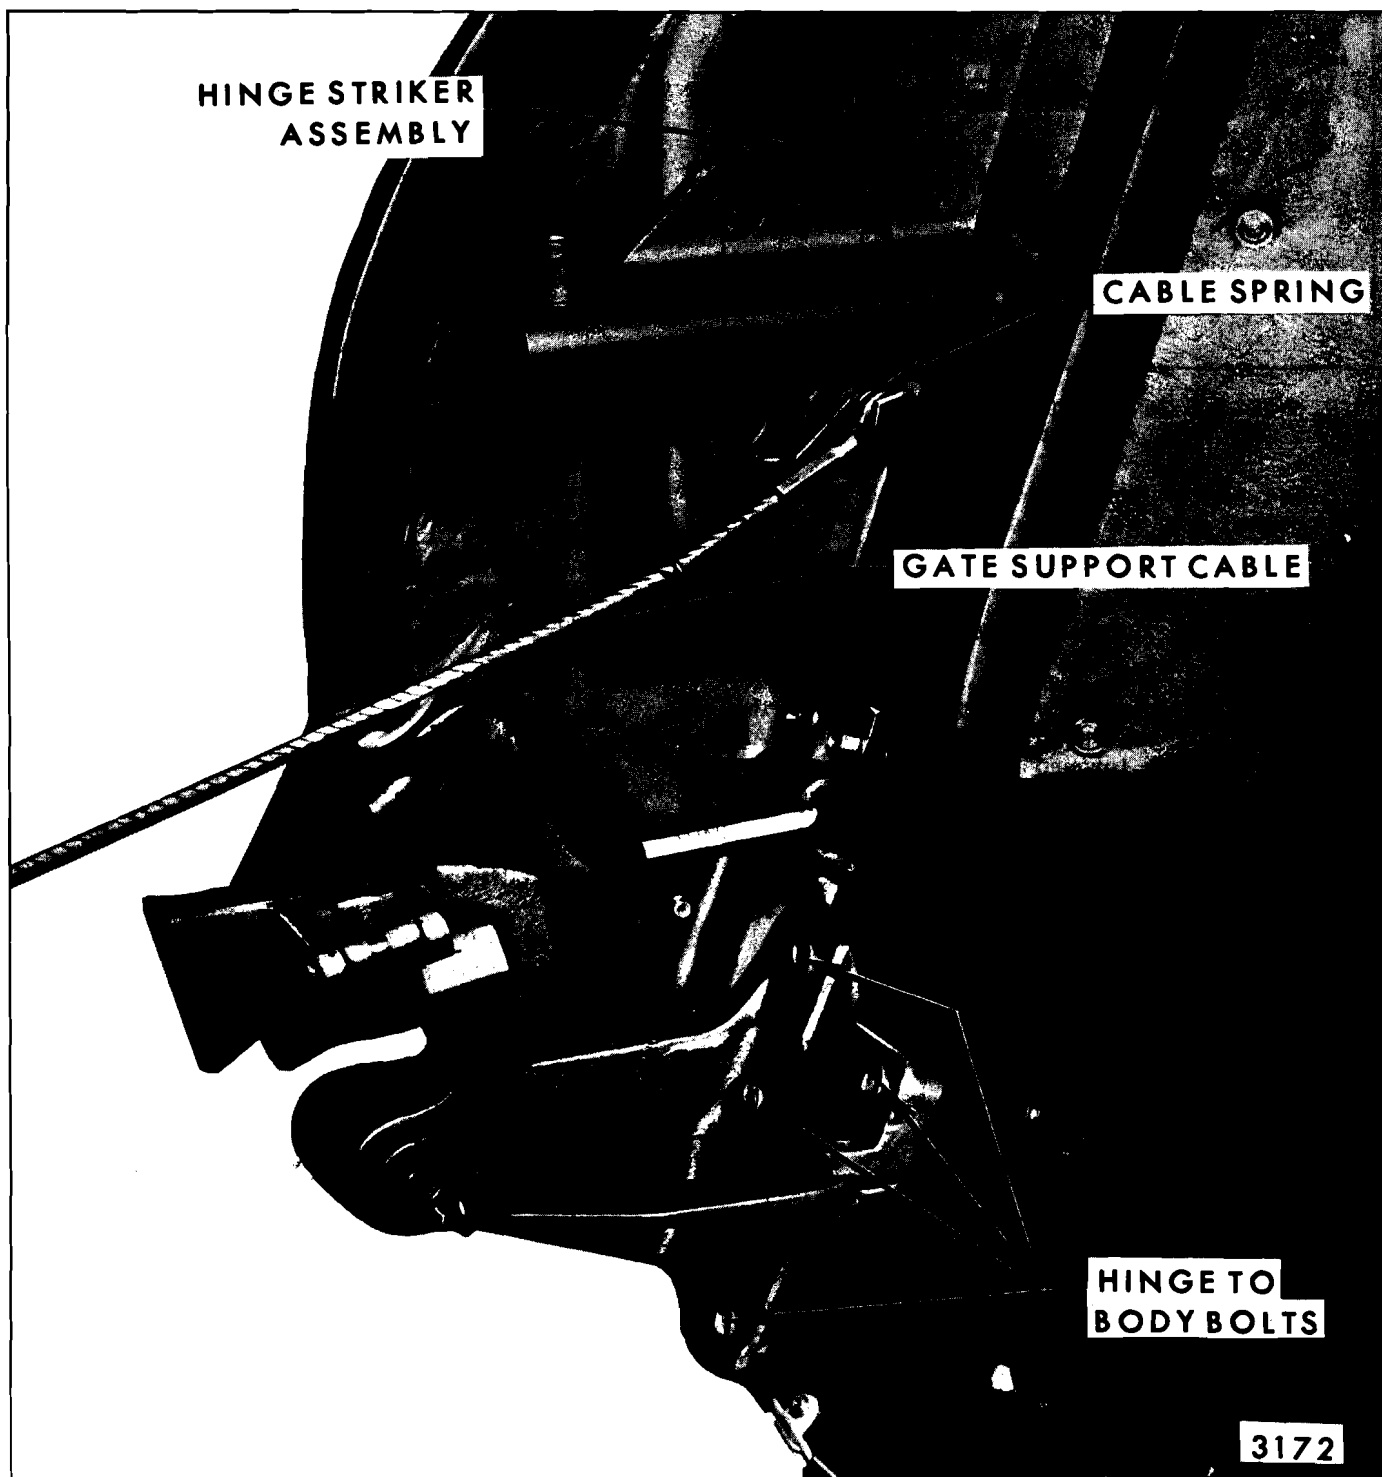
Tail Gate Adjustments - "B" Body Shown - "A" Body Typical
